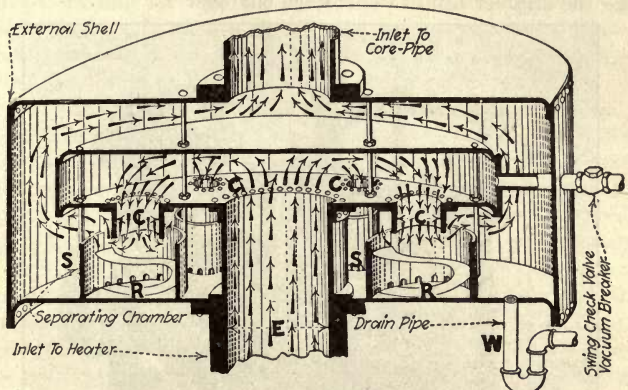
Oil-Separating Element Of Moffat Open Exhaust-Steam Feed-Water Heater.
